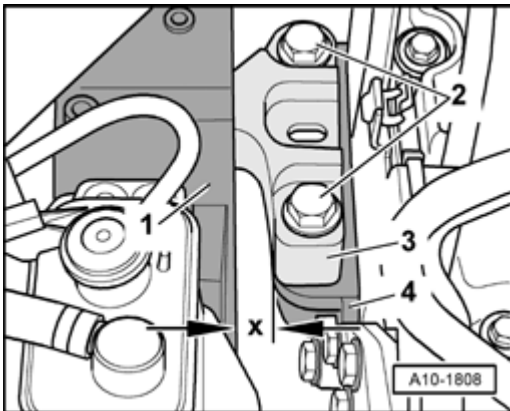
Checking Dimensions At Engine/Transmission Assembly Mounting
